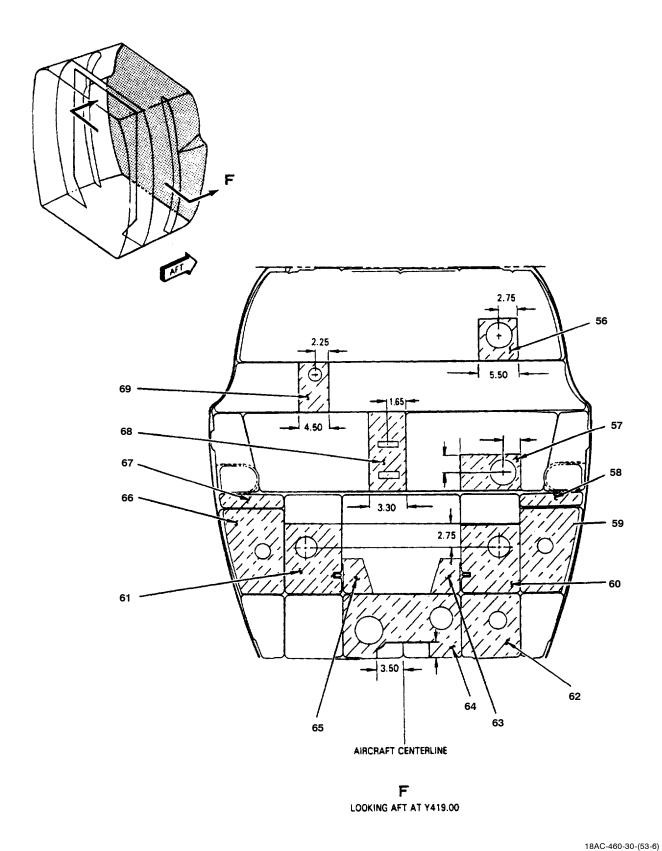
No. 2 Fuel Tank Cavity Foam Filler - 161353 THRU 161741 (Sheet 6)
